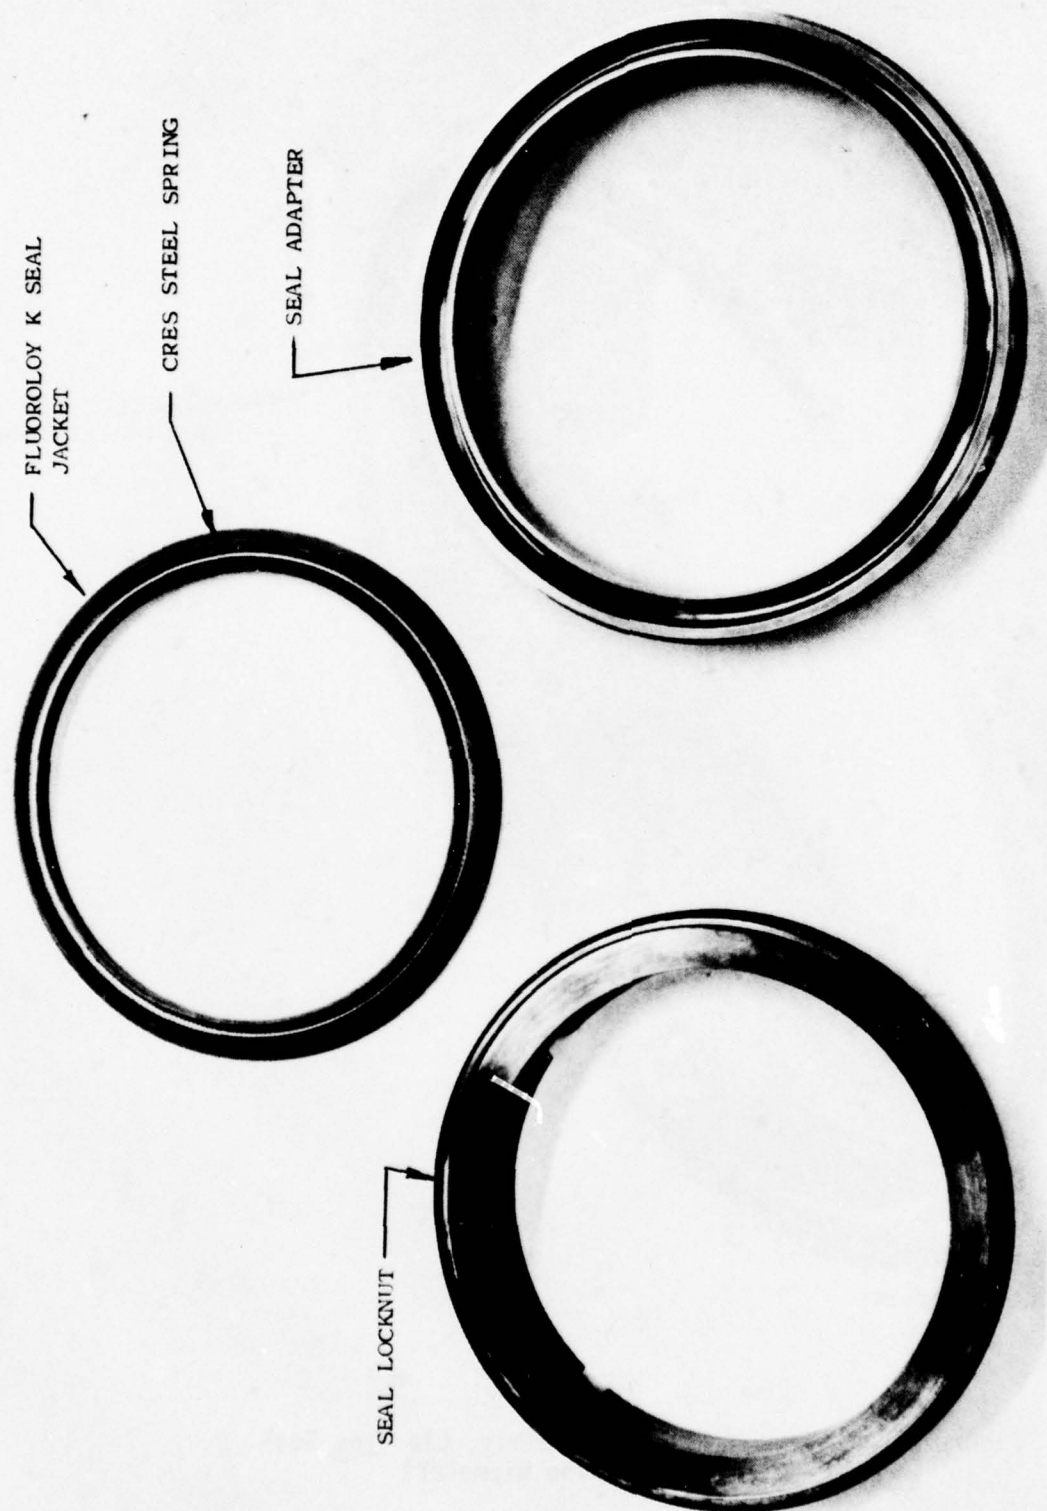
Rotary Shaft Seal Assembly, Lip Type Seal Components
